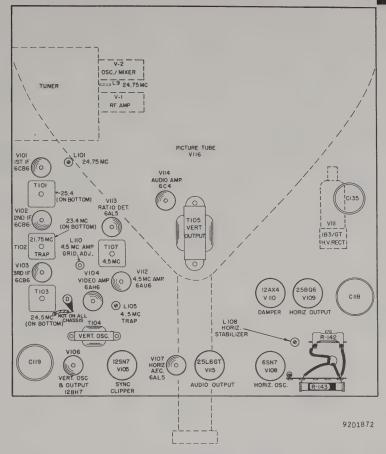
AA. Top View Chassis Alignment Locations for Chassis P & R1200D
